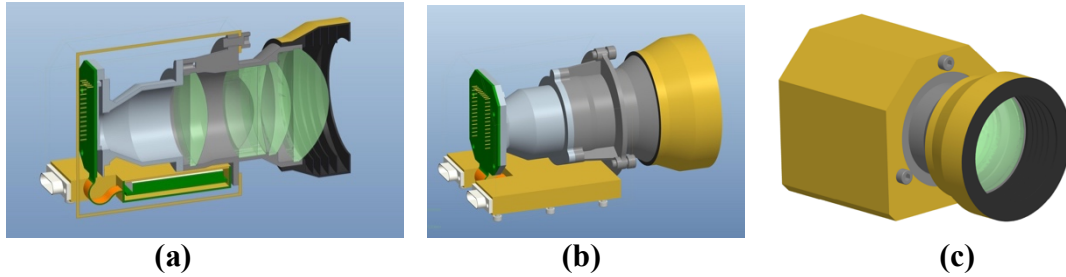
LUMIO-Cam Assembly; (a-b) Opto-Mechanical Assembly; (c) External Box .
